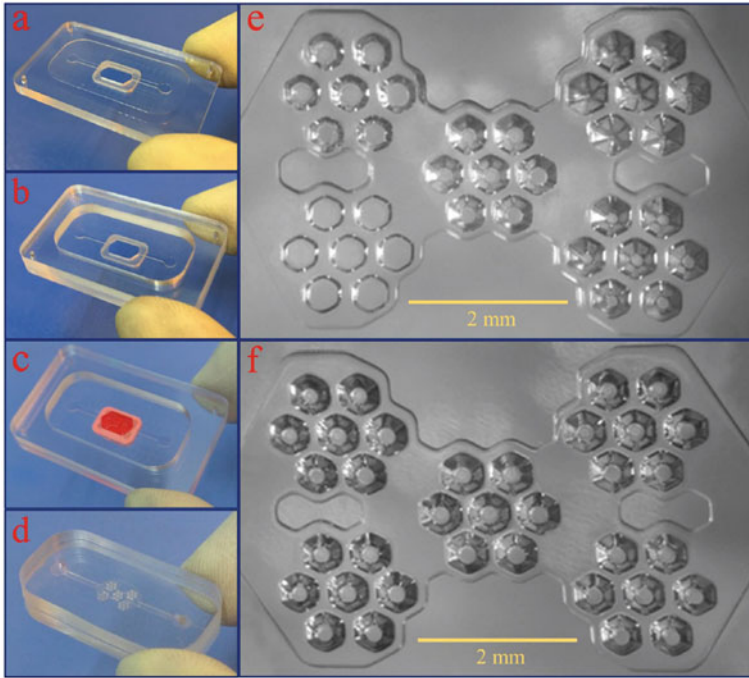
Microfluidic device—Steps to produce the master mold and casting with PDMS. a, b Two CNC milled parts are bonded to each other permanently using a solvent bonding method. c The 3D printed mold is assembled on the CNC mold and fixed with reusable putty adhesive. d The cover and microwell PDMS layers bonded together using the plasma bonding method to produce the microwell chip. e, f The optical micrographs of PDMS layers with the variable and constant depth (300 μm) microwells (Behroodi et al. [7]—licensed under CC BY 4.0)
